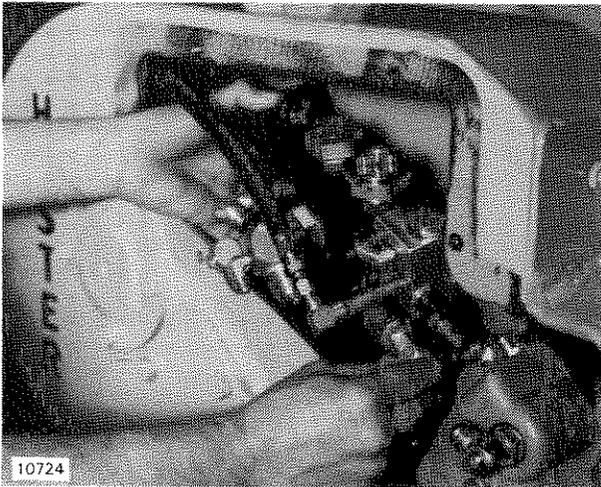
REMOVAL OF THE CONTROL VALVE AND ACCUMULATORS (Page 1 of 2)
